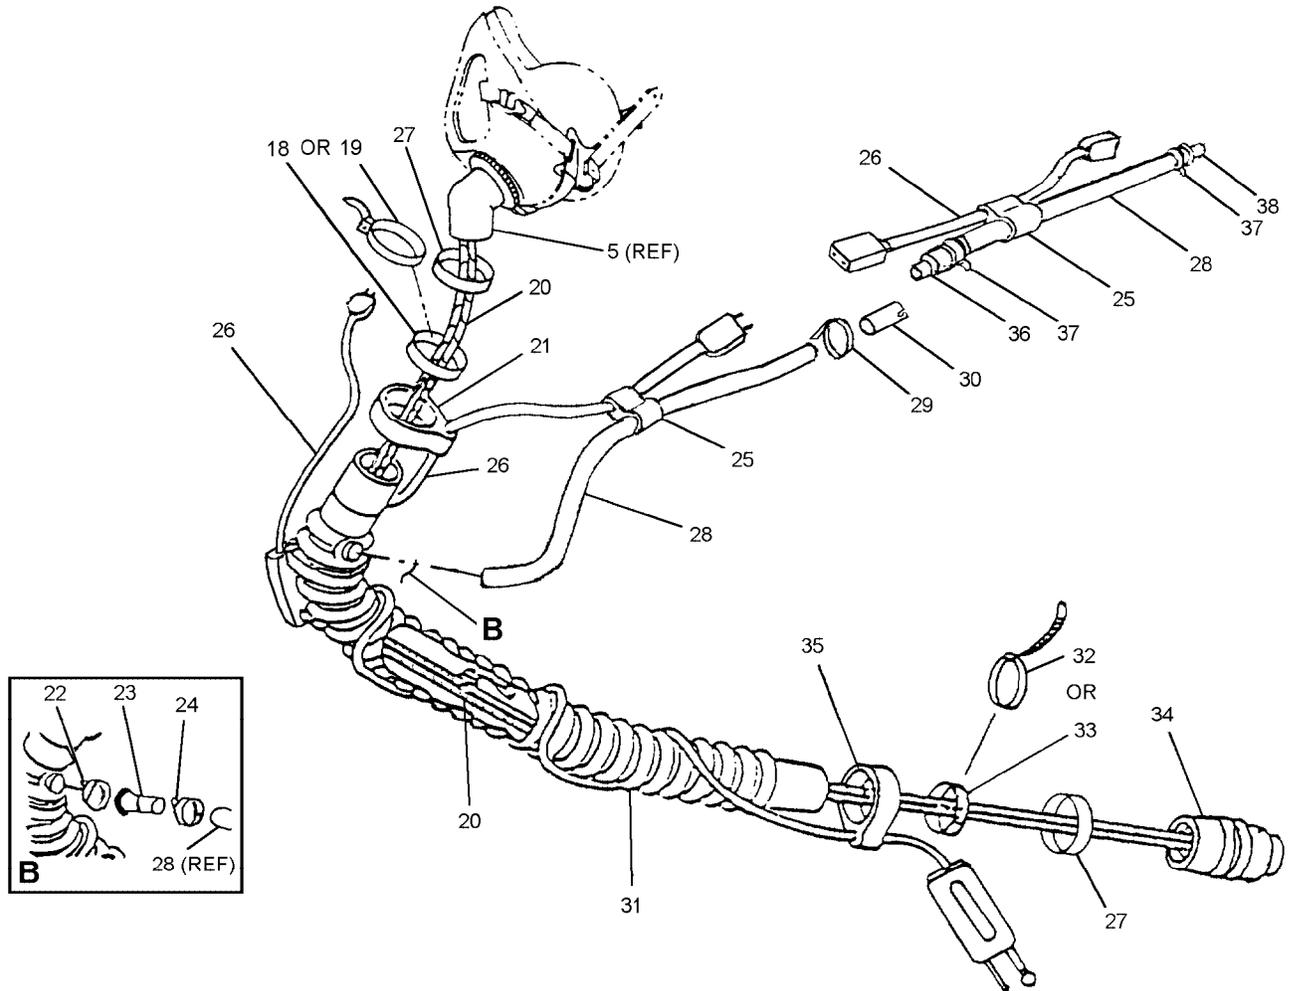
MBU-24/P22P-16 Oxygen Mask Assembly (Sheet 2 of 2)
